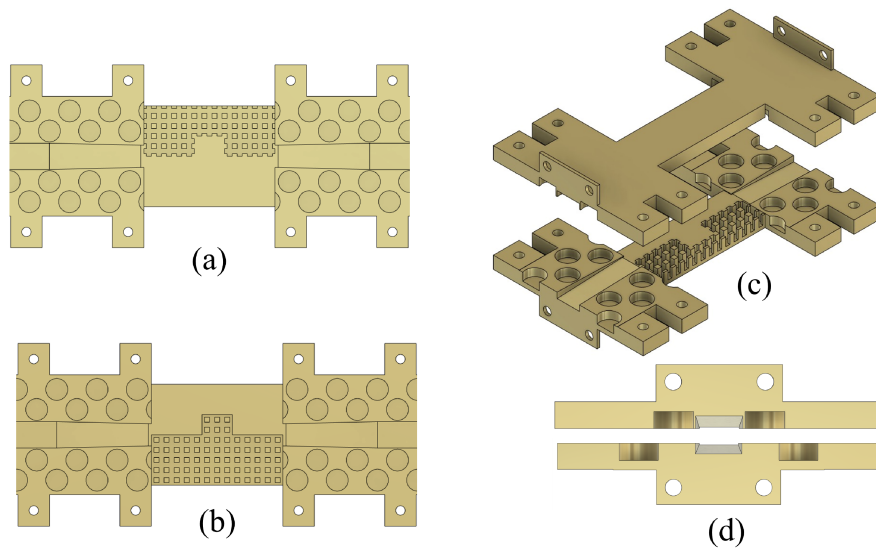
Possible layout of PTD-BEL with standard metallic WR34 flange (a) Top Layer, (b) Bottom Layer, (c) 3-Dimensional View, (d) Front view.
